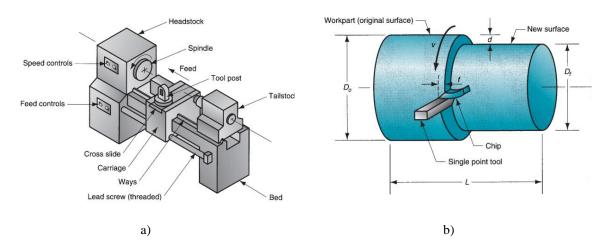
Lathe illustrations a) Lathe machine,b) Lathe illustrative operation
